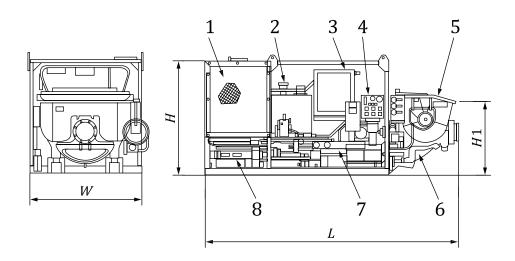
Truck-mounted concrete pump for connection of a conveying pipeline
